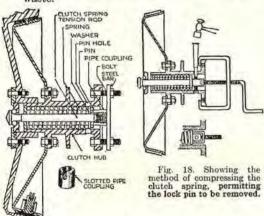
Showing the method of compressing the clutch spring. The steel bar is 5/16" x 1" x 4". The bolt holes are \$\frac{8}{4}\text{"} and 3" between centers. The pipe coupling is \$\frac{8}{4}\text{"} inside diameter; the slots are about \$\frac{3}{4}\text{"} deep.
